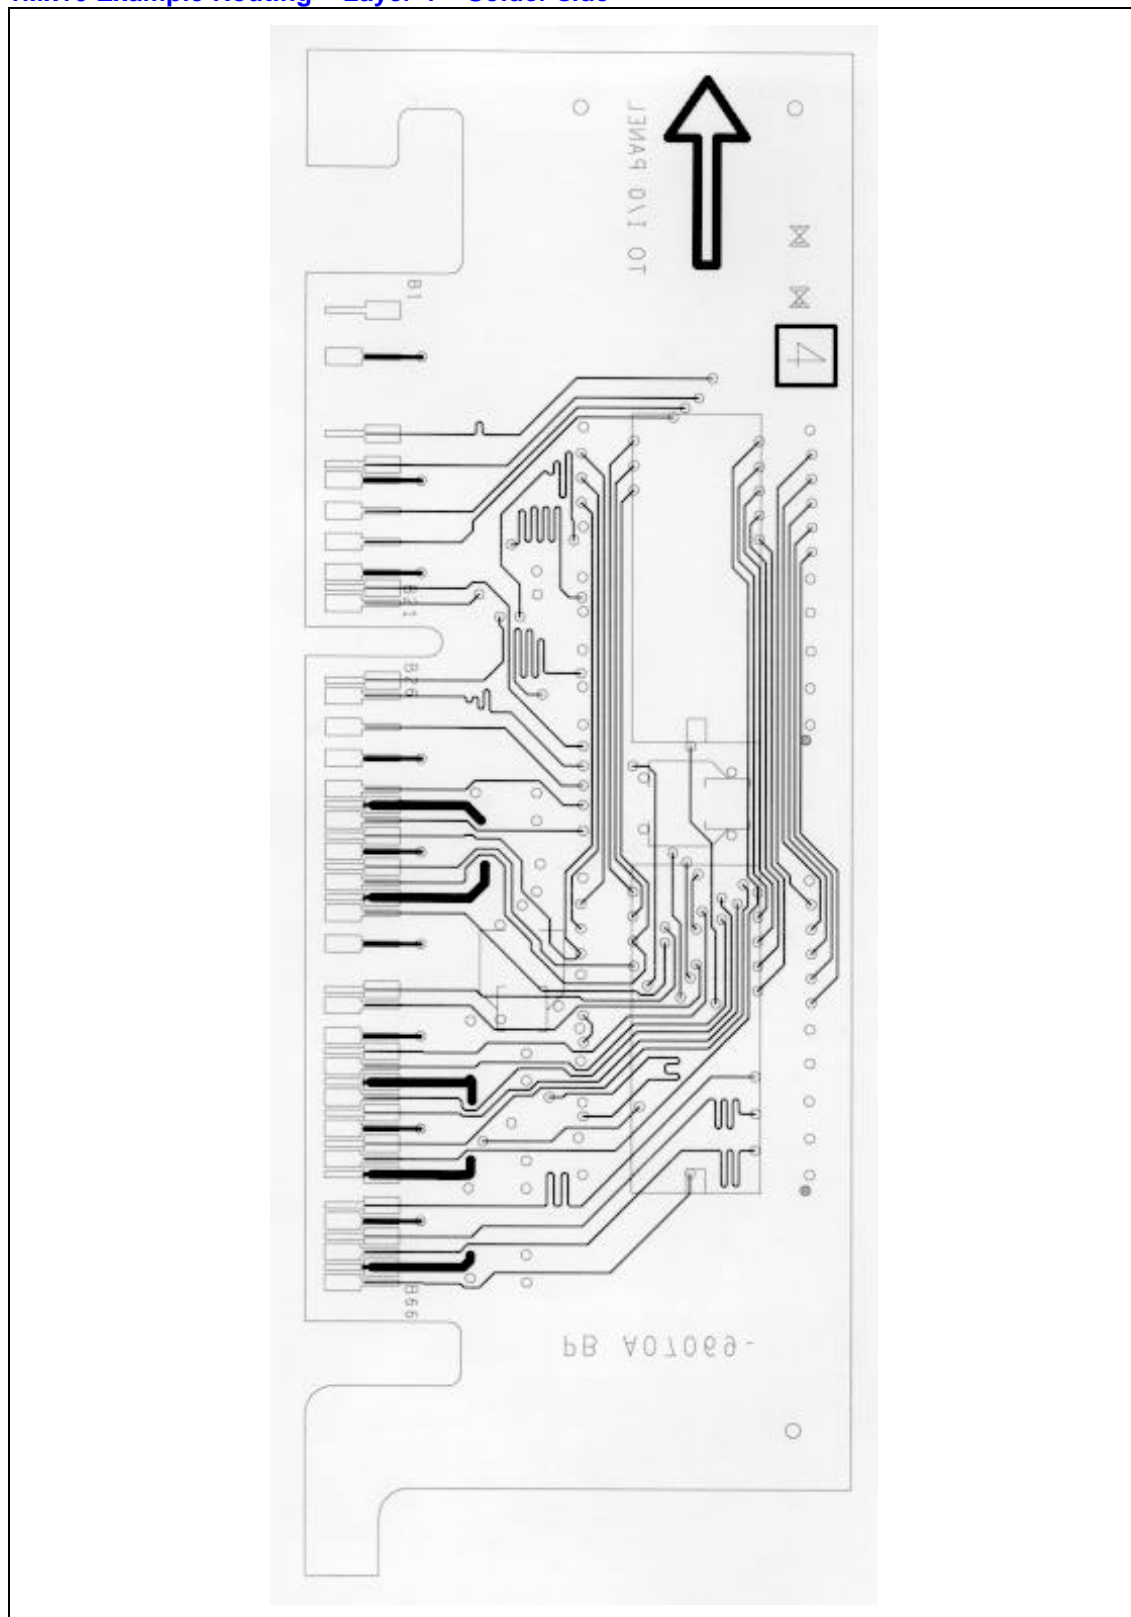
1Mx16 Example Routing – Layer 4 – Solder side
